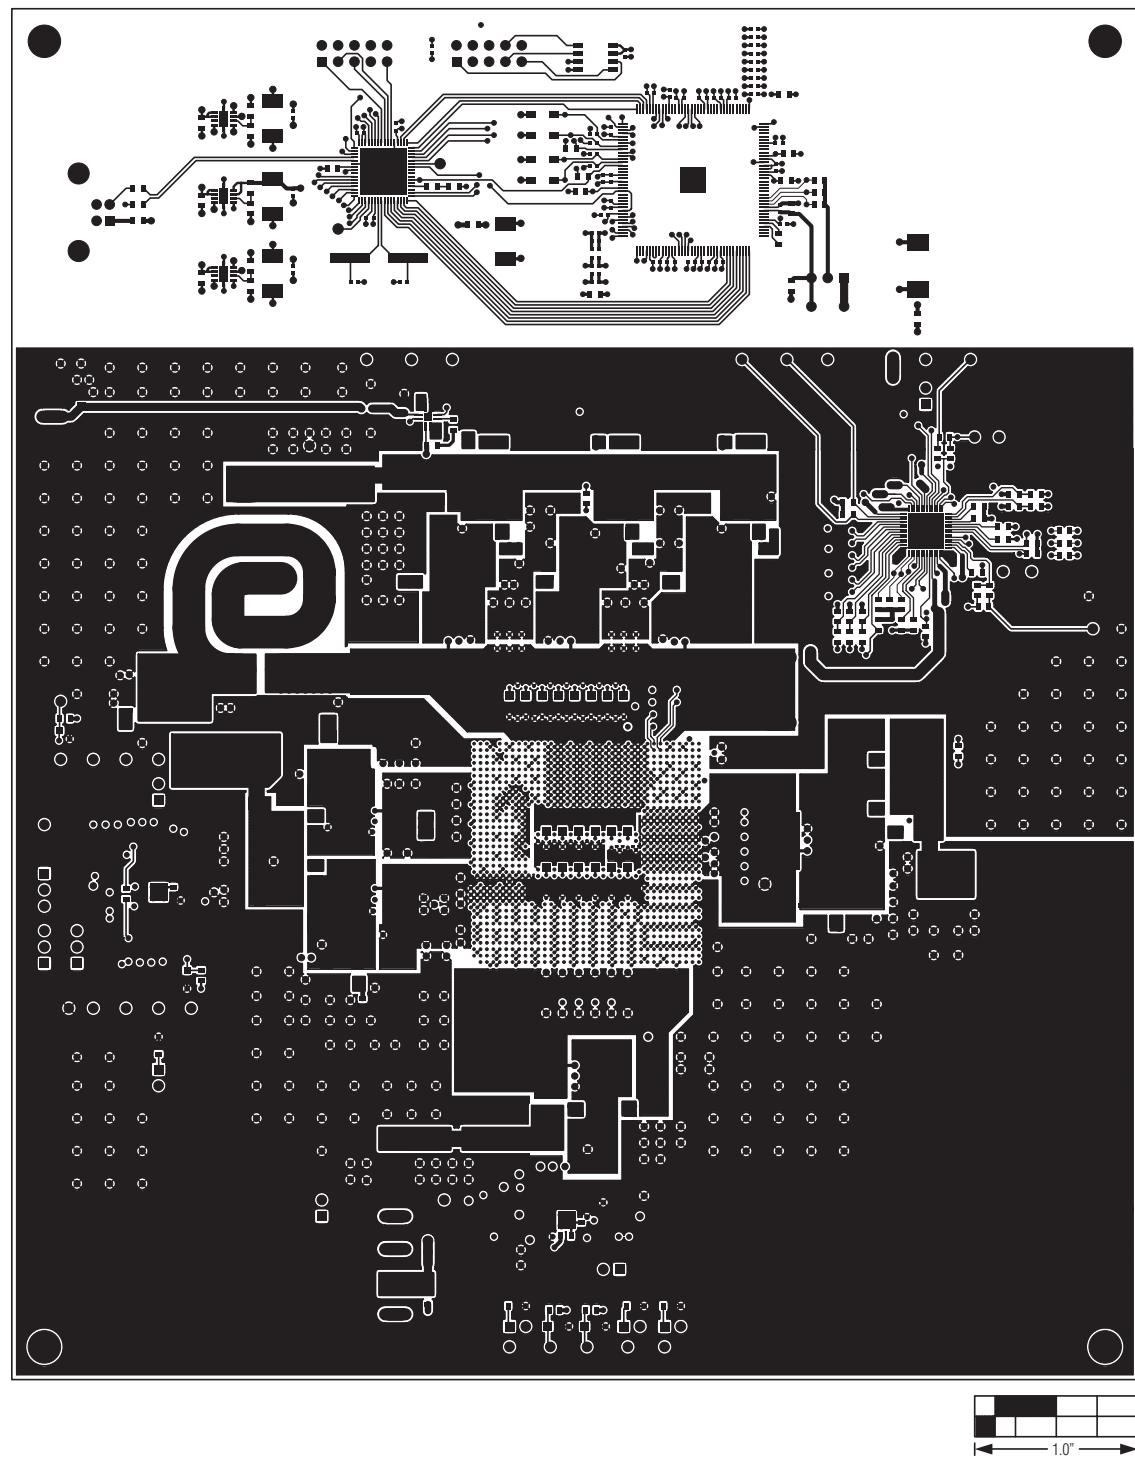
MAX17039 EV Kit PCB Layout—Component Side
